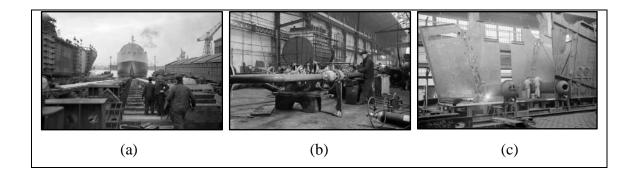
(a) Boat on the Nord-Pas de Calais's harbor, (b) Welding of materials in the Workshop and (c) Assembling materials to prefabricate a boat [67].
